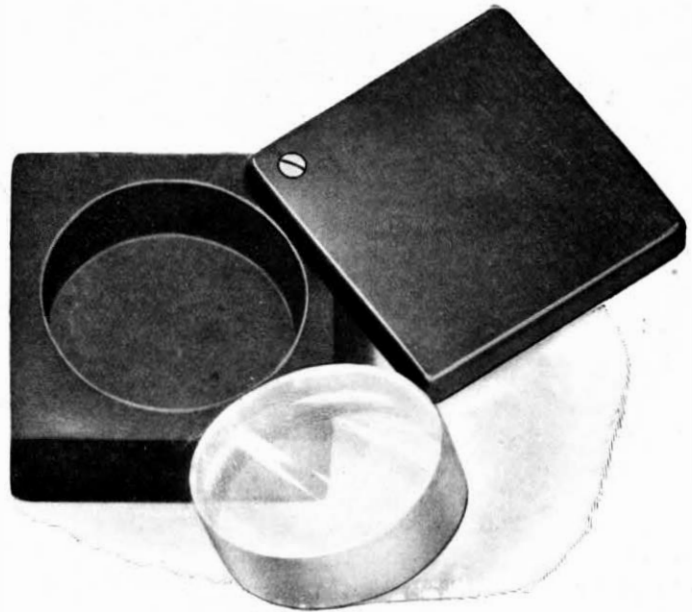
OPTICAL FLAT FOR TESTING SURFACES OF SLIP GAUGES, ETC.
